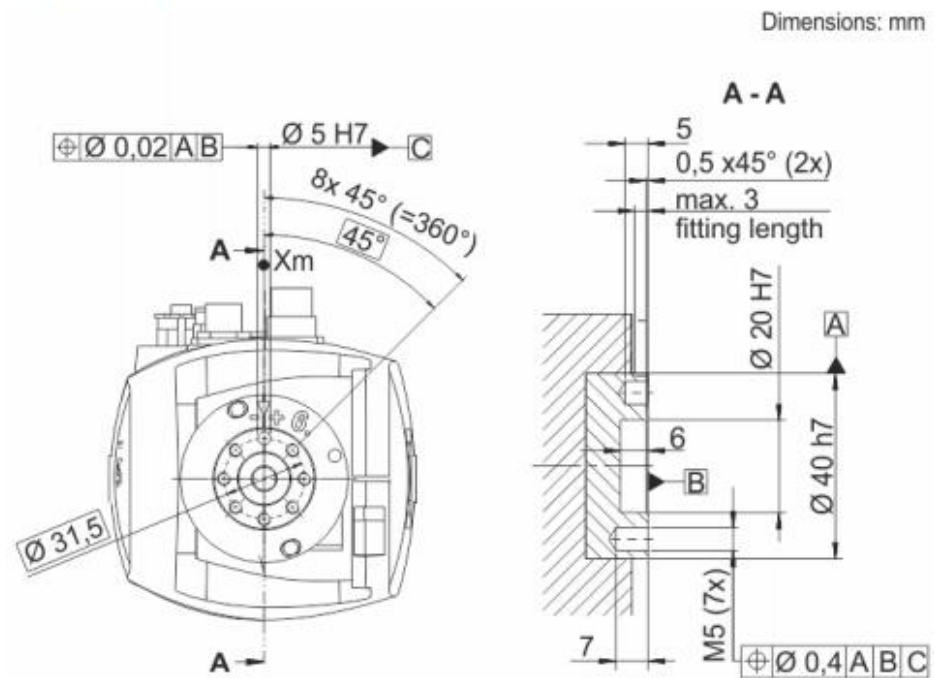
KUKA KR10 R1420 Mounting flange dimensions
